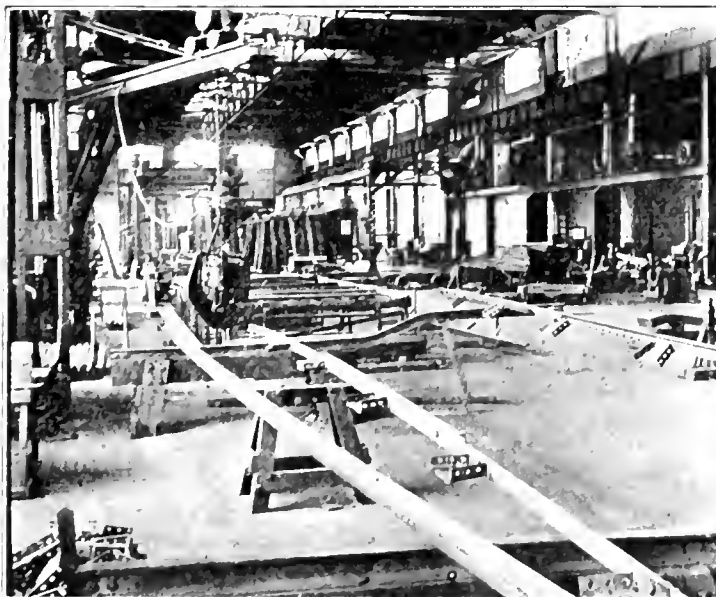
Assembling Parts for Steel Freight Car Side Rails.
